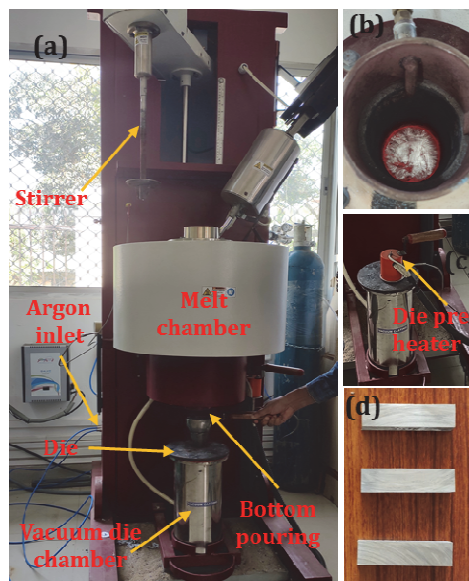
Vacuum-die casting setup (a) Stir melting and casting furnace with vacuum die attachment; (b) Melt chamber; (c) Die pre-heater; (d) Sectioned cast specimens for the preparation of Charpy impact testing.
